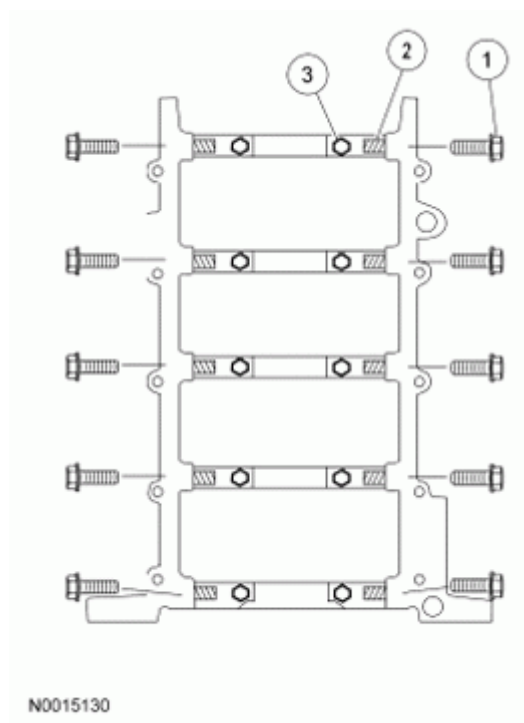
Identifying Main Bearing Cap Bolts And Stud Bolt
